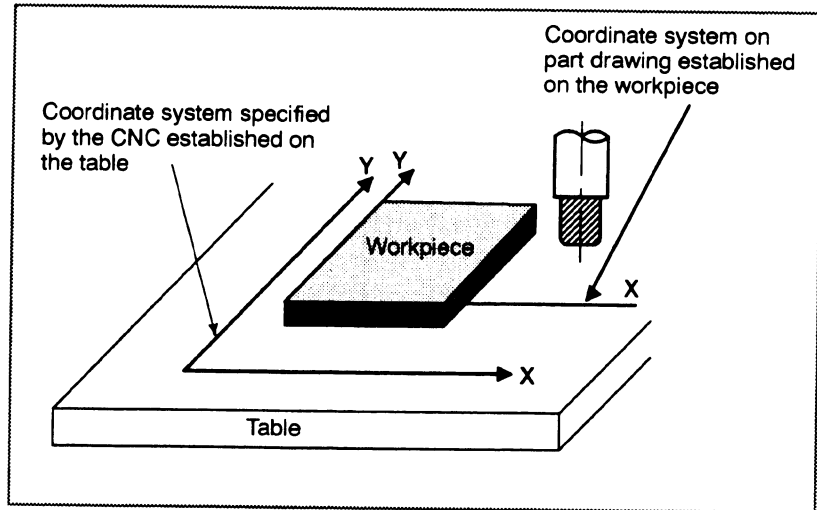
(c) Coordinate system specified by CNC and coordinate system on part drawing
